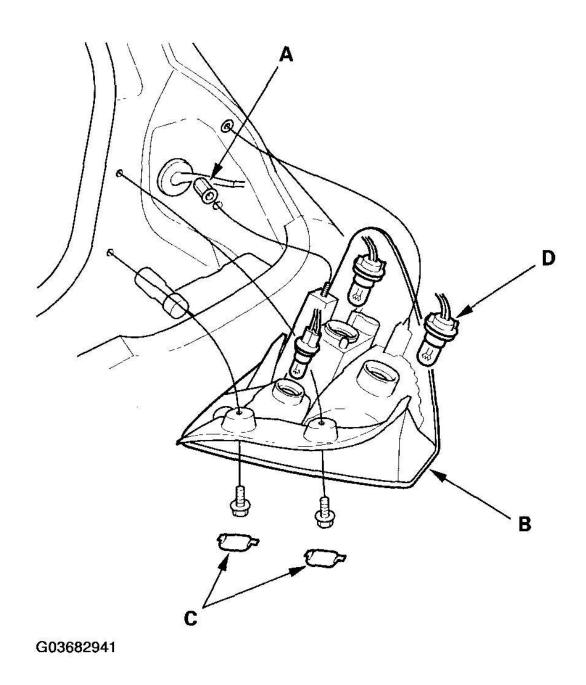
Removing Mounting Nut From Taillight Courtesy of AMERICAN HONDA MOTOR CO., INC.
